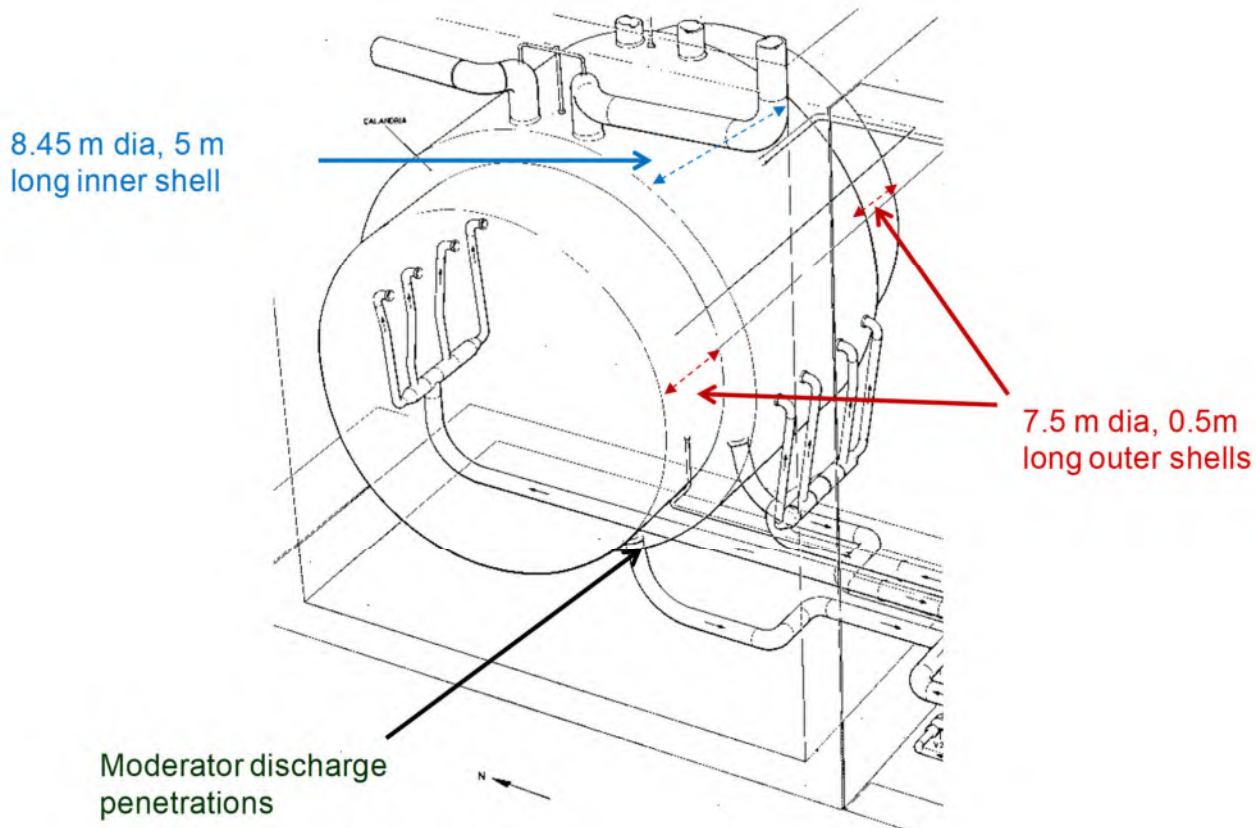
Calandria vessel, a stepped stainless steel vessel with welded annular plate
